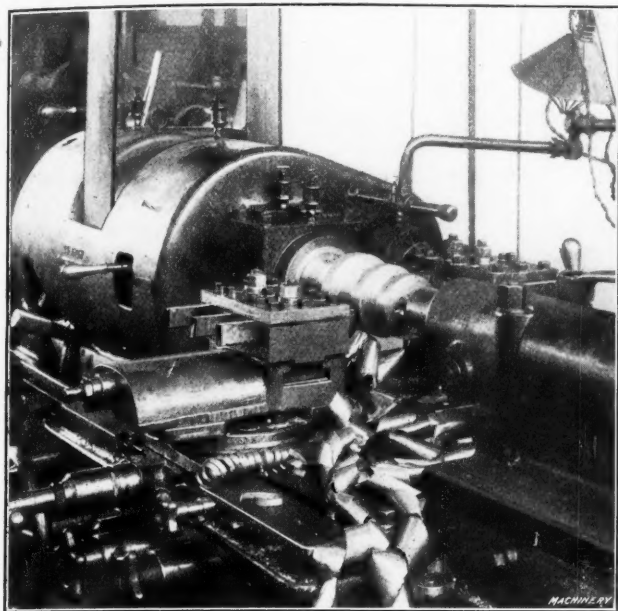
Lodge & Shipley Patent Head Lathe turning and forming Blanks for Cluster Gears
